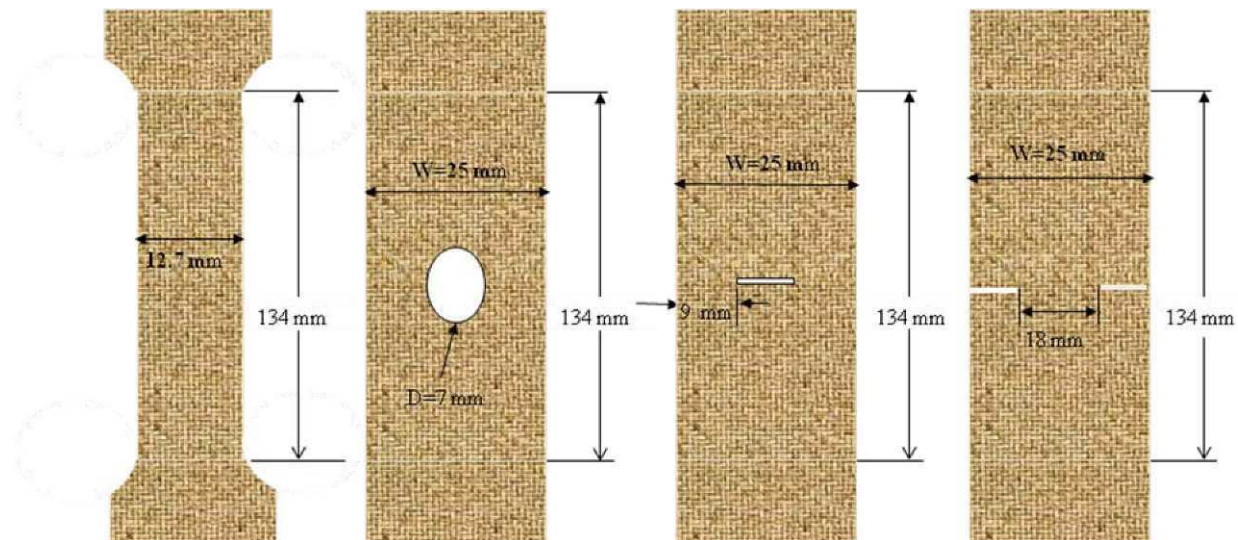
Schematic drawing and geometry of tensile specimens, (a) Dog-bone specimen without a defect (DB), (b) with a center hole (CH), (c) with a center crack (CC), (d) with an edge crack (CH)
